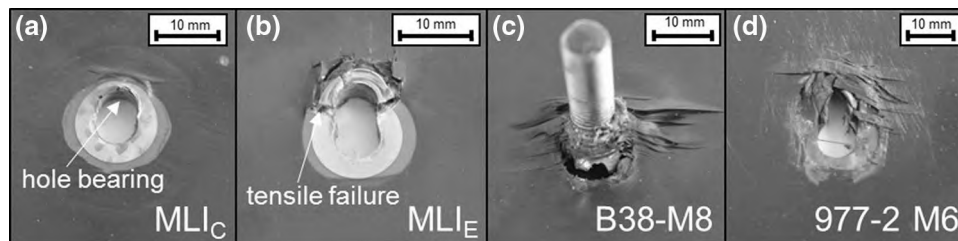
Failed specimen after the in-plane shear test. The MLI specimen exhibit two consecutive damage states. After the initial hole bearing failure (a), the MLI specimen exhibit a tensile failure of the
